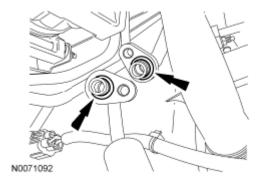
Locating A/C Tube Nuts Courtesy of FORD MOTOR CO.
